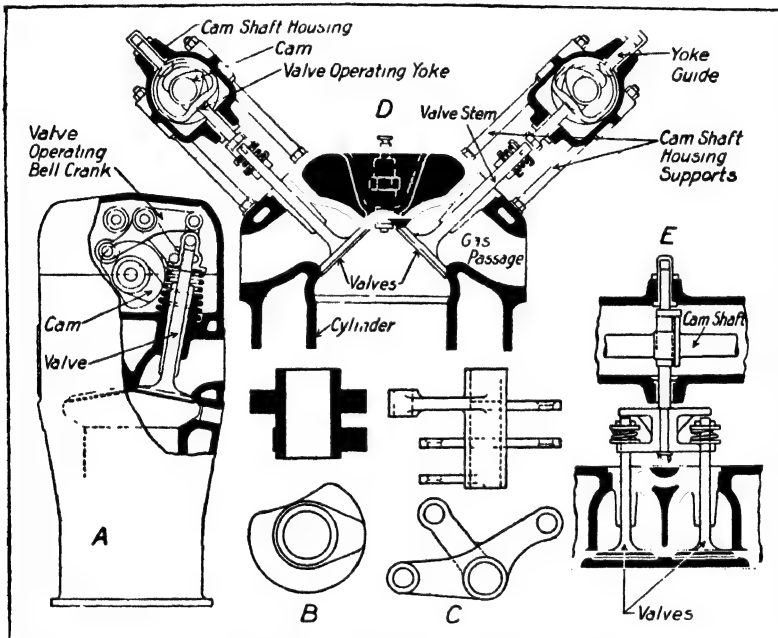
Two Methods of Operating Automotive Engine Valves by Positive Cam Mechanism which Closes as Well as Opens Them.
